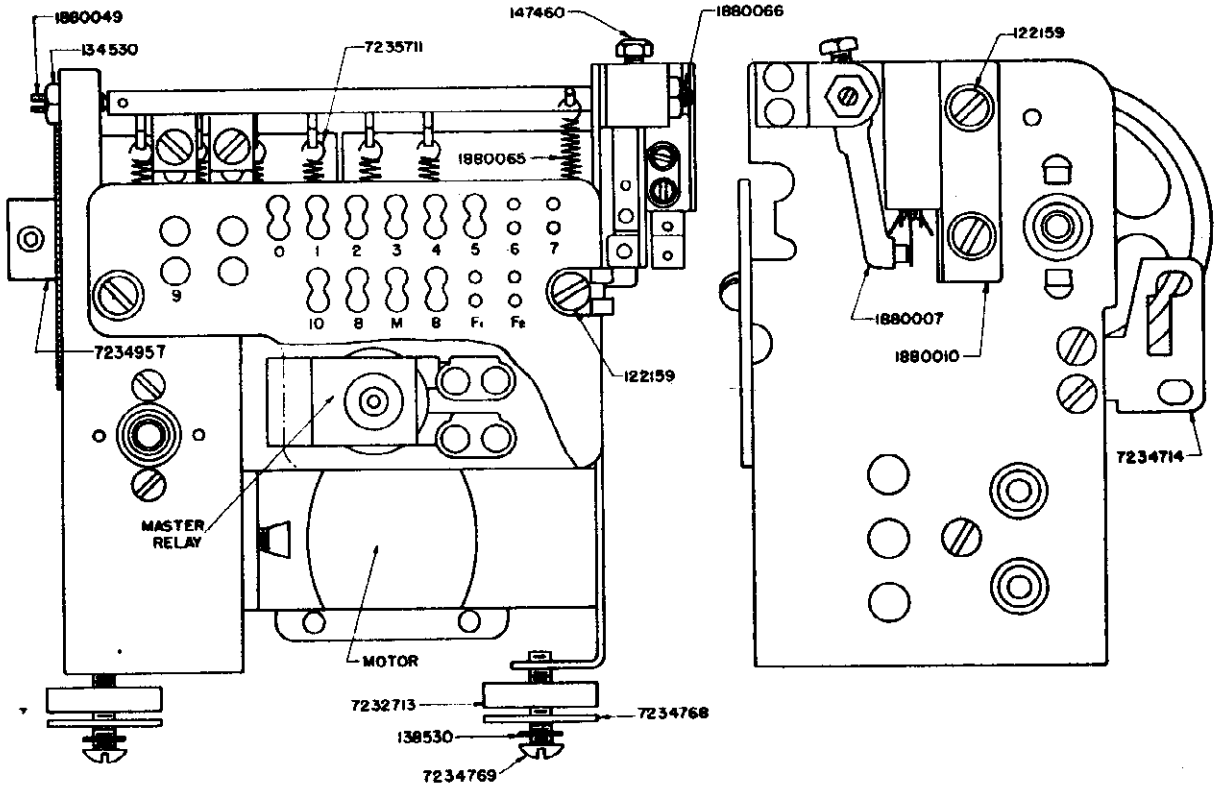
PARTS LAYOUT--DELCO-MATIC TUNER
